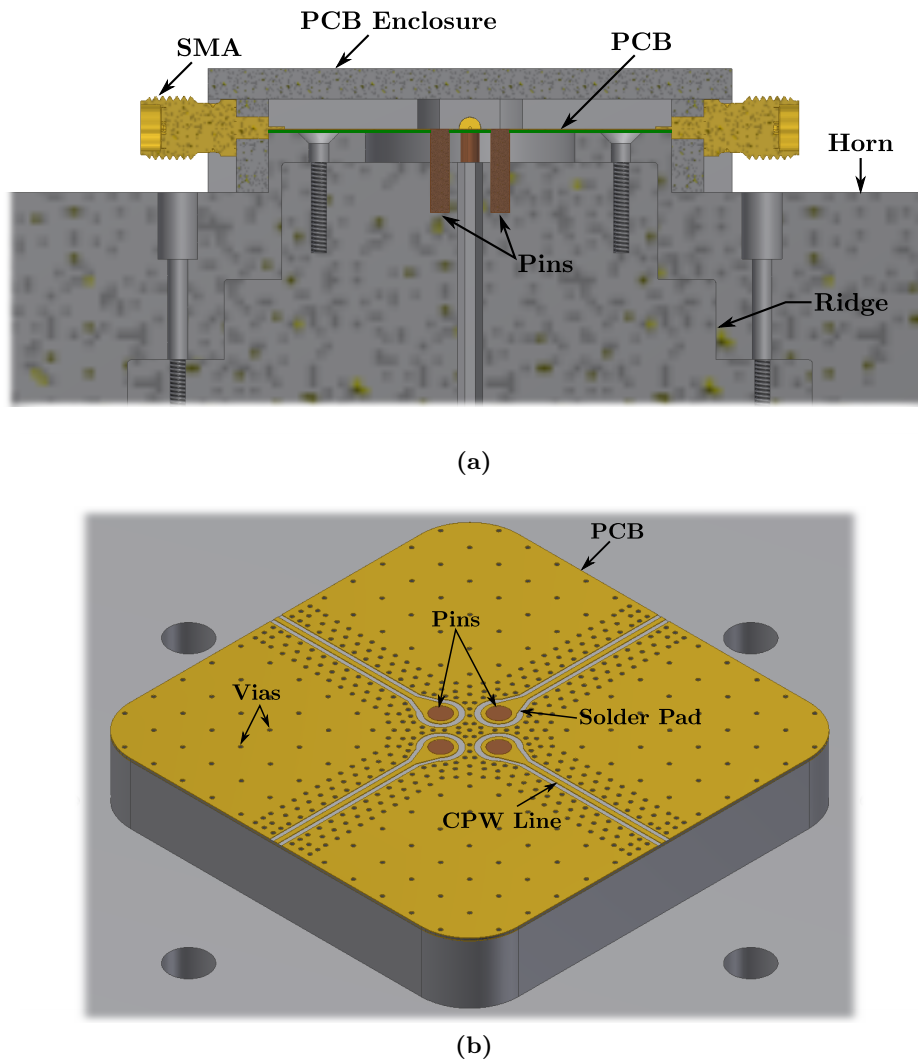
(a) Cross-section view and (b) top view of the PCB solution on the back of the horn.
